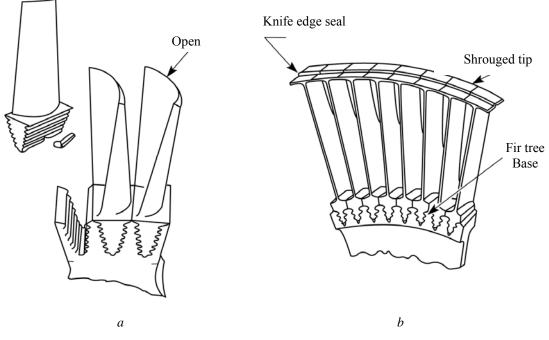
Open and shrouded blades and its attaching to disc: a — open end type blade; b — shrouded type blade
